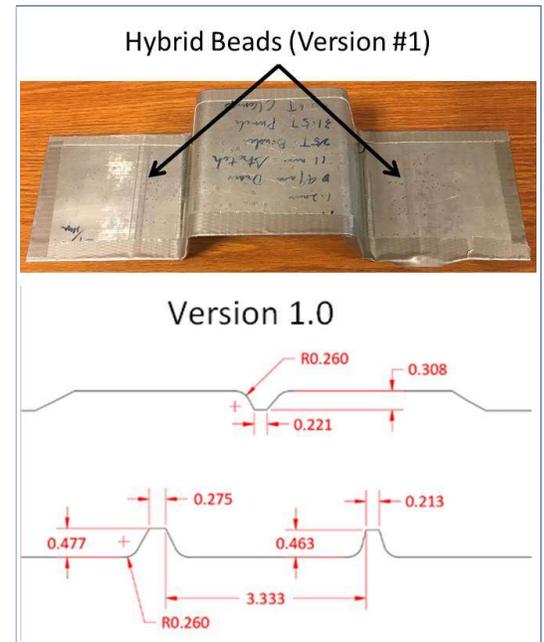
v1.0 Hybrid Bead Design with Laboratory-Scale Hat Section Component
